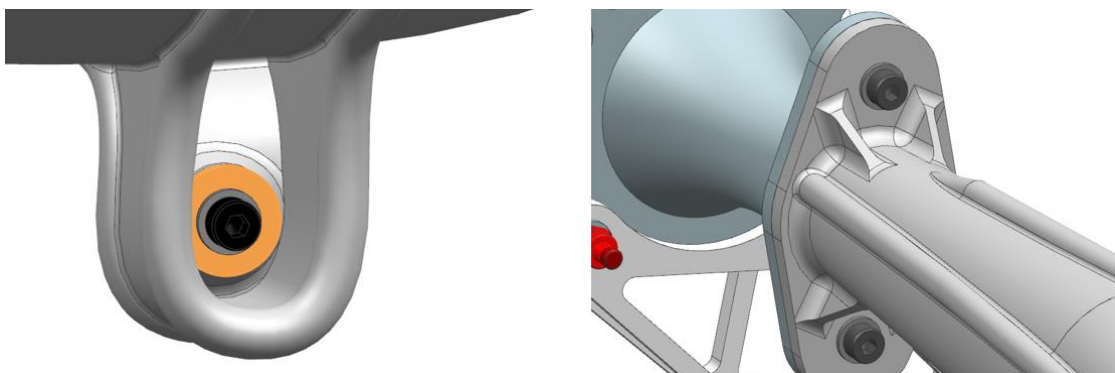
Plenum mount (insert highlighted) and restrictor flange mounts
